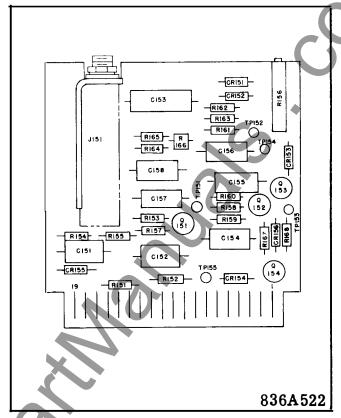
Component locations on the carrier level indicator printed circuit board - germanium version.
